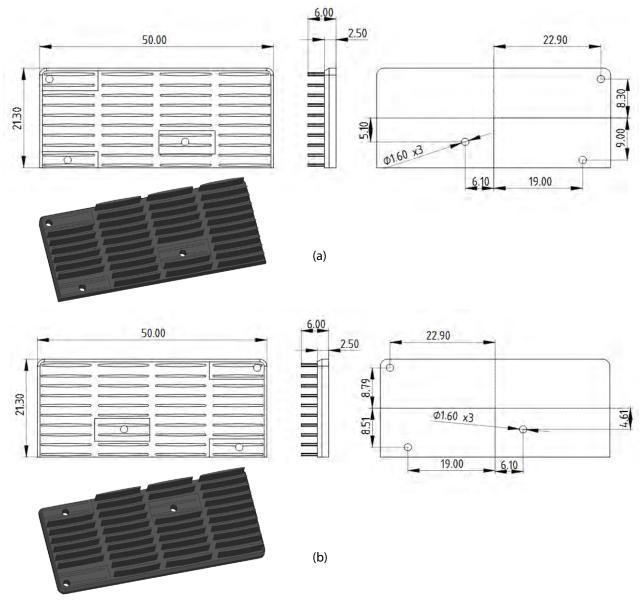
Top side and (b) bottom side heatsink drawing. Units in mm. Heatsink Drawing based on Alpha Novatech part UB2150-6BM-147, drawing S08EHS0D and S08EHS0E
